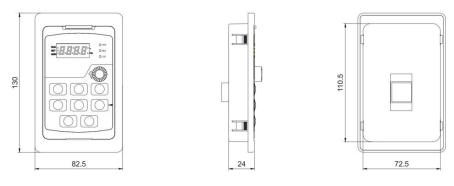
External and installation dimensions (S2 all / T3 0.4 to 11kW)
